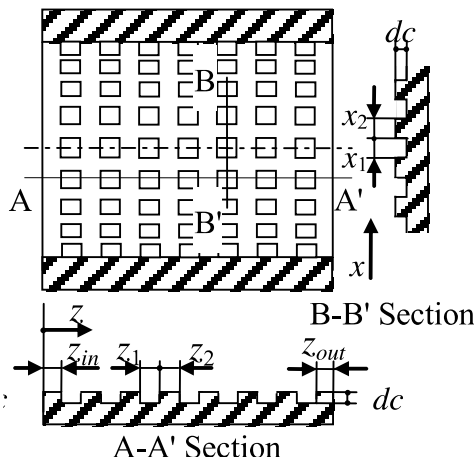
Geometry of square-hole pattern seal (cross-sectional view)
